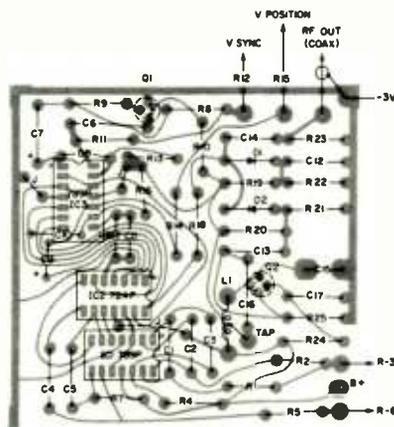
COMPONENT-SIDE of the PC board. Call-outs show where parts are located.
